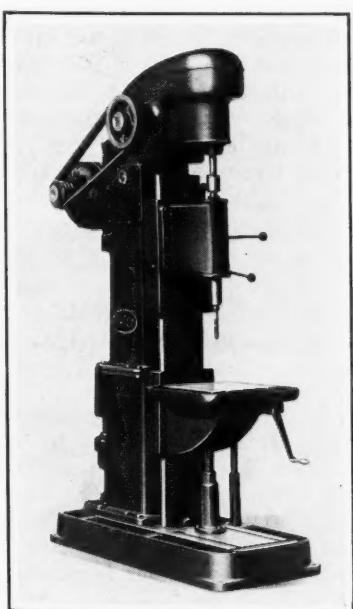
Natco Single-spindle Drilling Machine with Semi-automatic Hydraulic Feed
